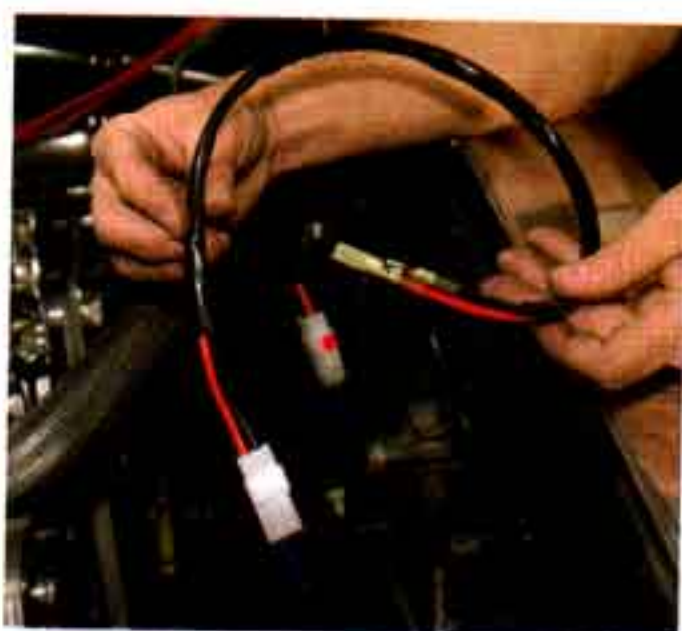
& 32b: The fan wiring harness kit includes two short leads with a red and black wire that plug into the electric fans. This will allow you to unplug the fans and remove them if you ever need to.
